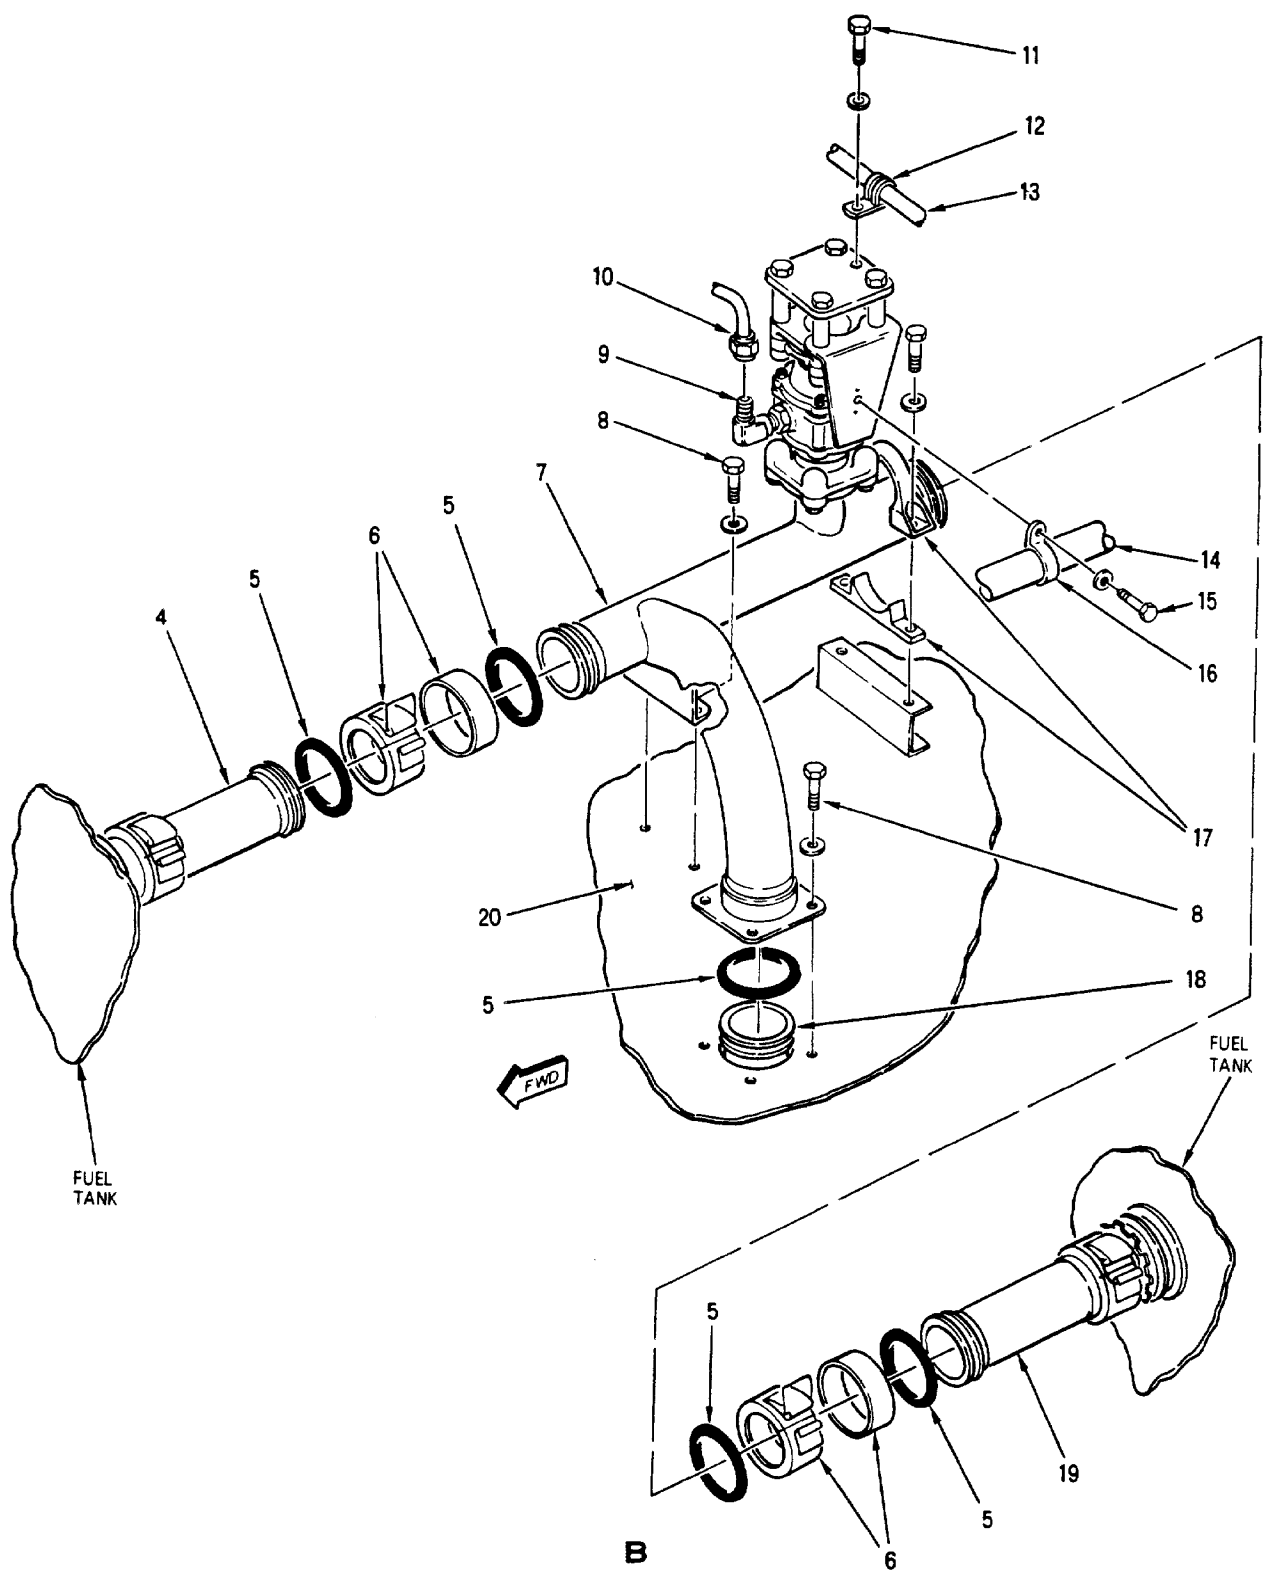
Defuel Valve (5VAP521) (Sheet 2)
